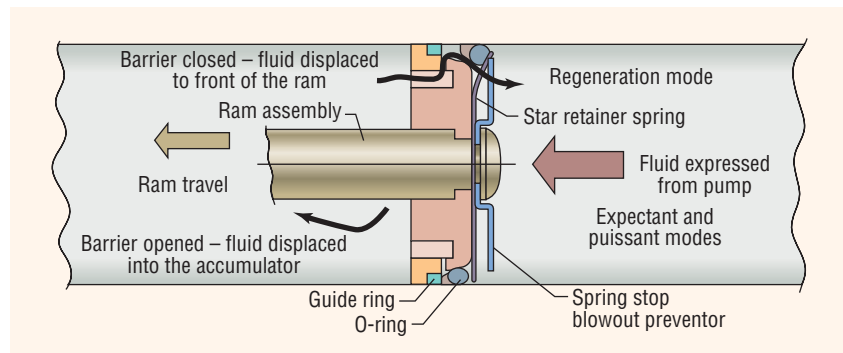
Two views of operation of unidirectional FastFlow™ valve's floating-seal O-ring. In bottom half of drawing, the O-ring forms a tight seal dynamic seal between the piston and the cylinder wall. In the top half, greater pressure on the rod side unseats the O-ring, and the valve orifice effectively is an annulus whose OD is the cylinder's bore.
